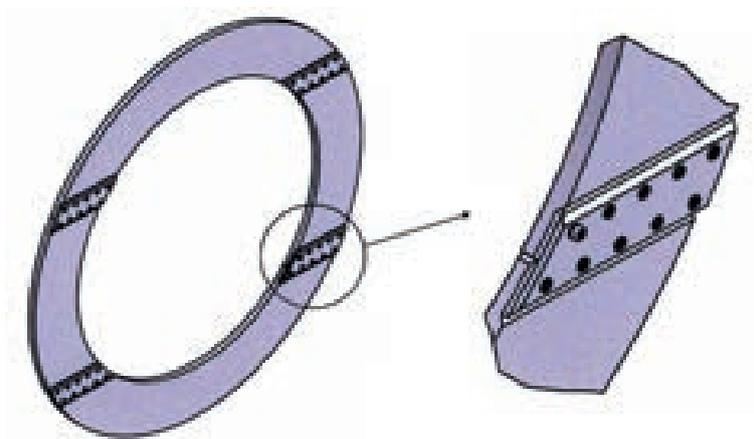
The segments of the upstream flange are connected by bolting a plate over the connection.
